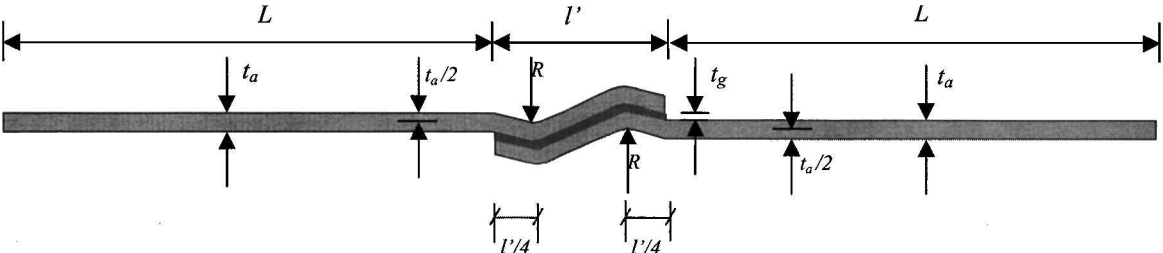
Geometry and dimensions of the wavy-lap joint.
